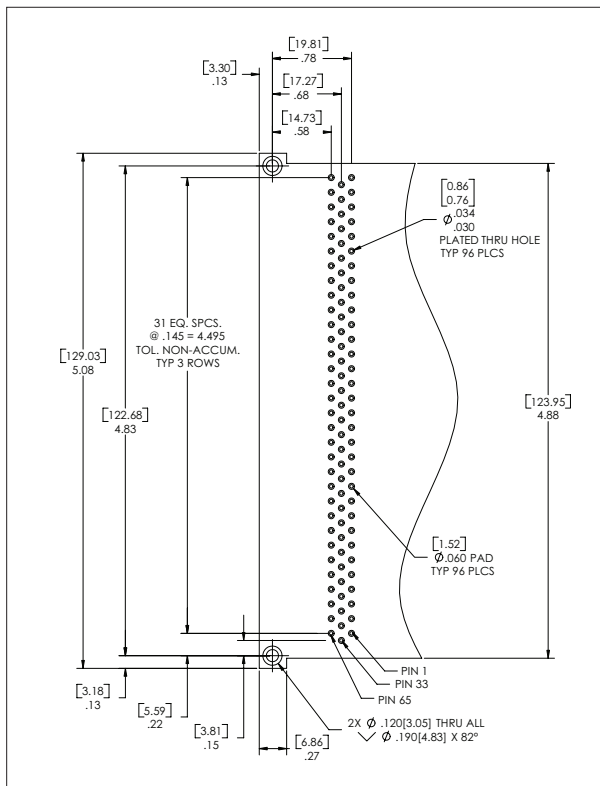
108 125 recommended board layout. Solder side shown.
